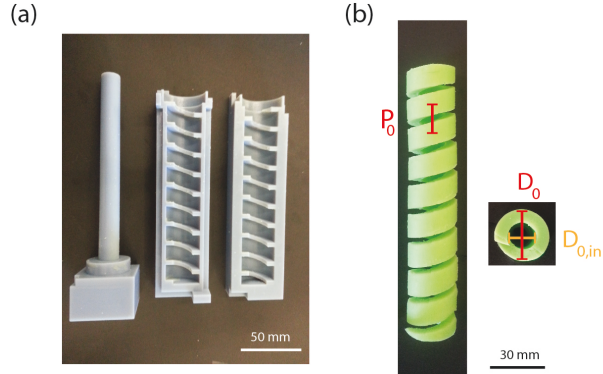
Fabrication. (a) 3-D printed plastic mold, and (b) elastomeric helix manufactured using the mold and casting approach.
